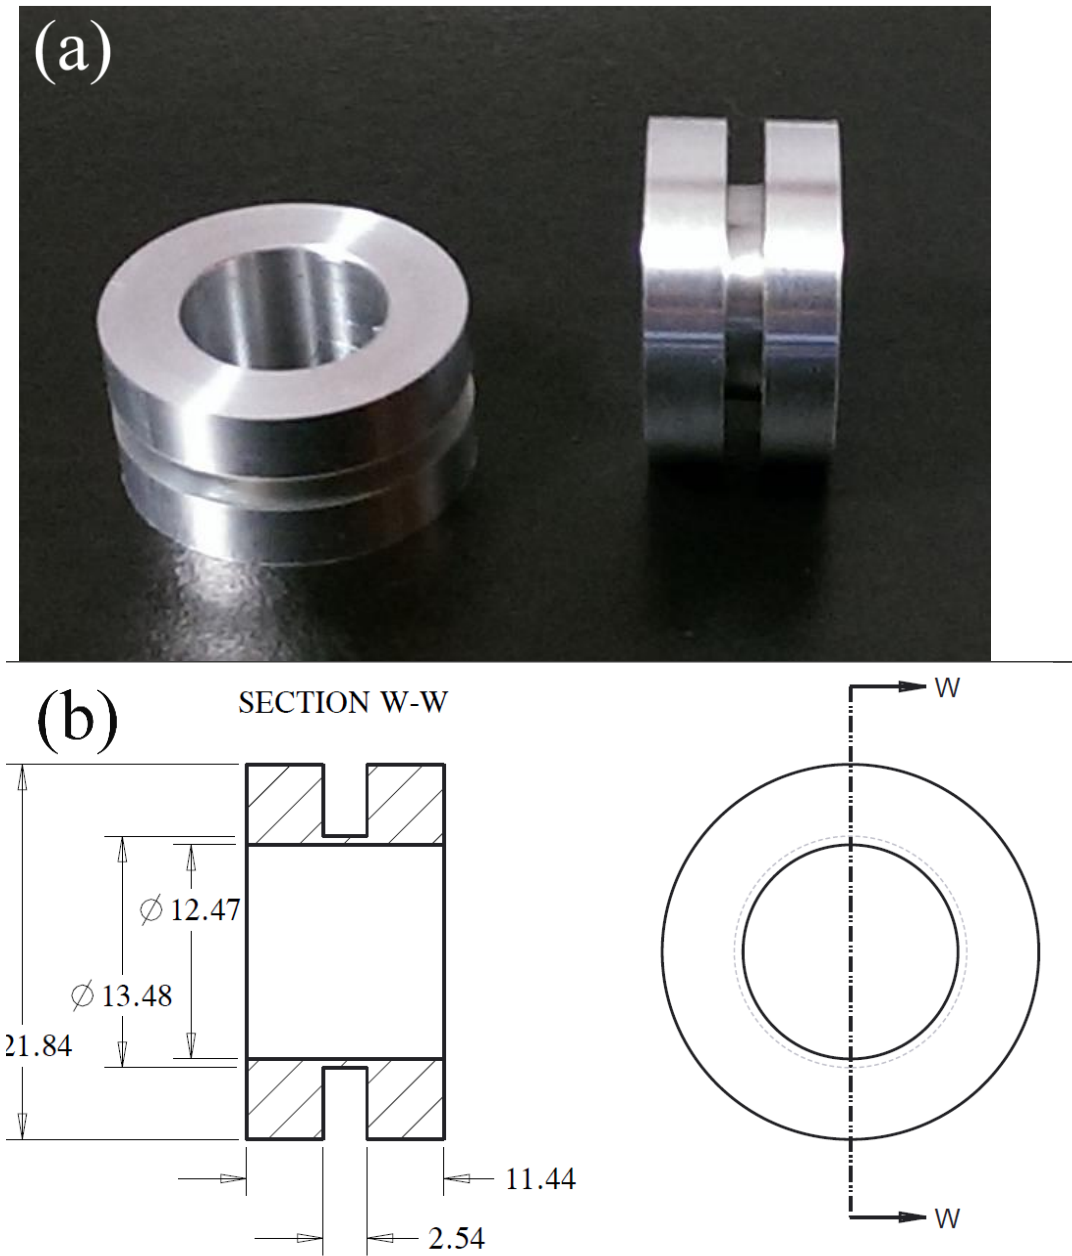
Typical thin wall tubular specimens (a) and dimensions, given in mm (b).
